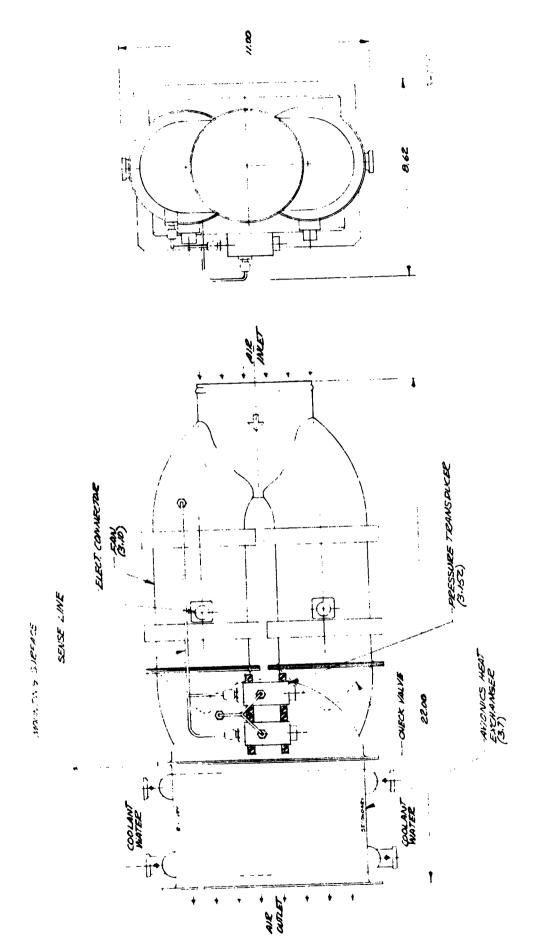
Air-Cooled Avionics Package Assembly, LRU 3-B
